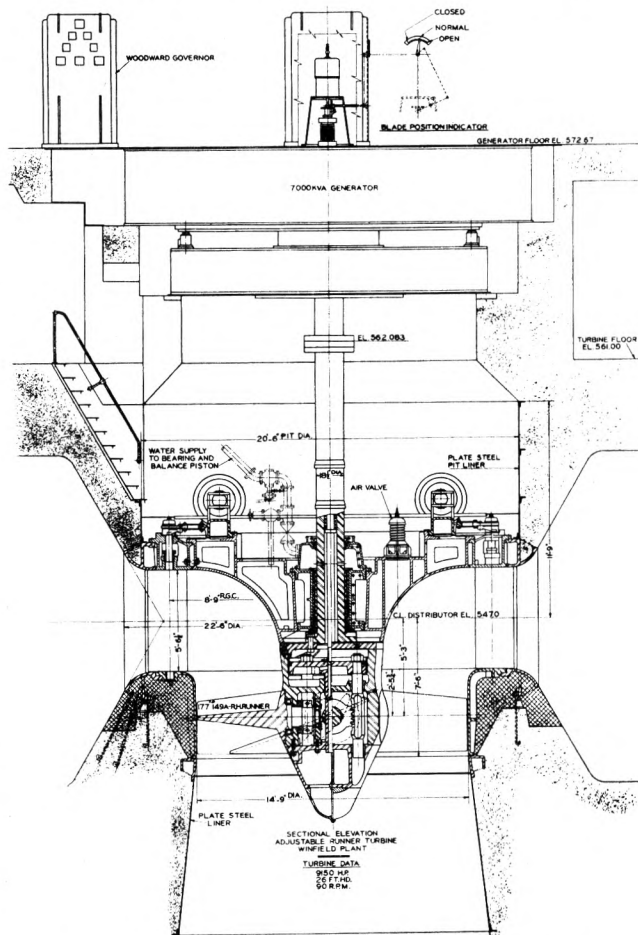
SECTIONAL VIEW OF 9150-Hp WINFIELD UNIT
